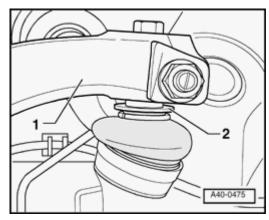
Identifying Steering Arm & Tie Rod Ball Joint Sealing Washer Courtesy of VOLKSWAGEN UNITED STATES, INC.
